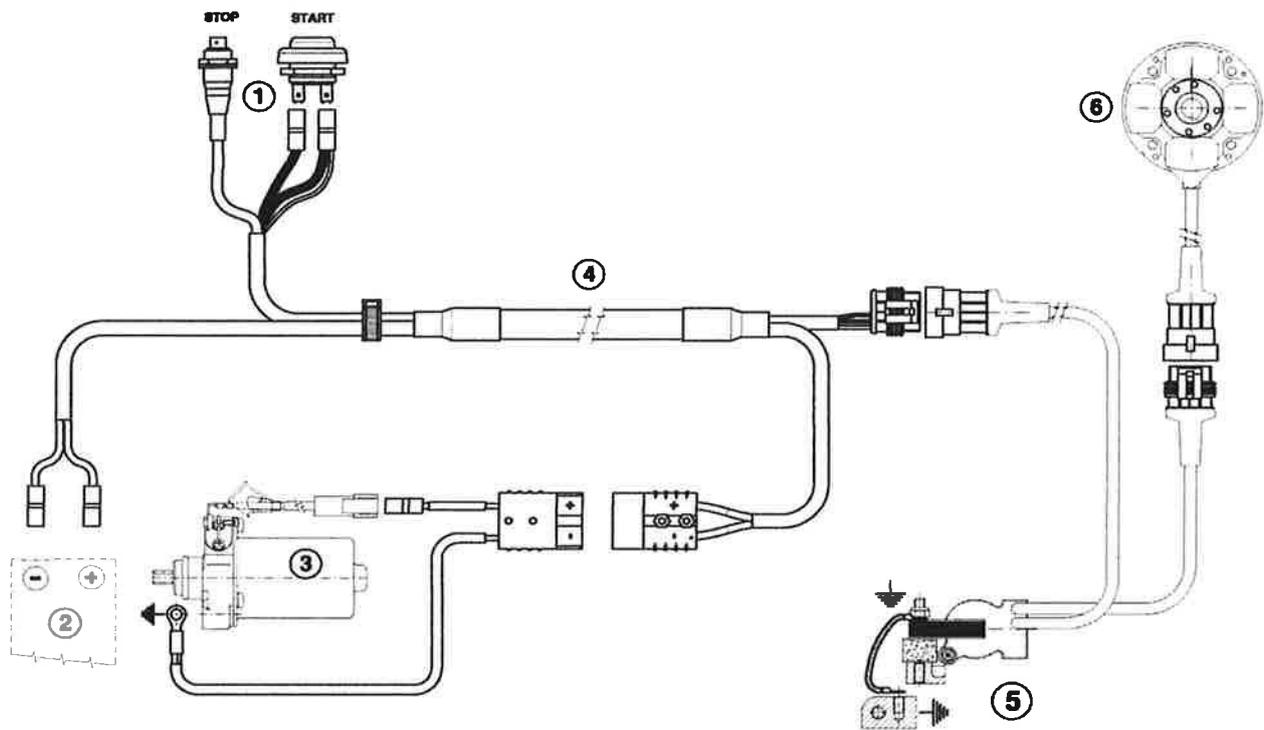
PHOTO COMPLETE ALTERNATIVE WIRING LOOM
